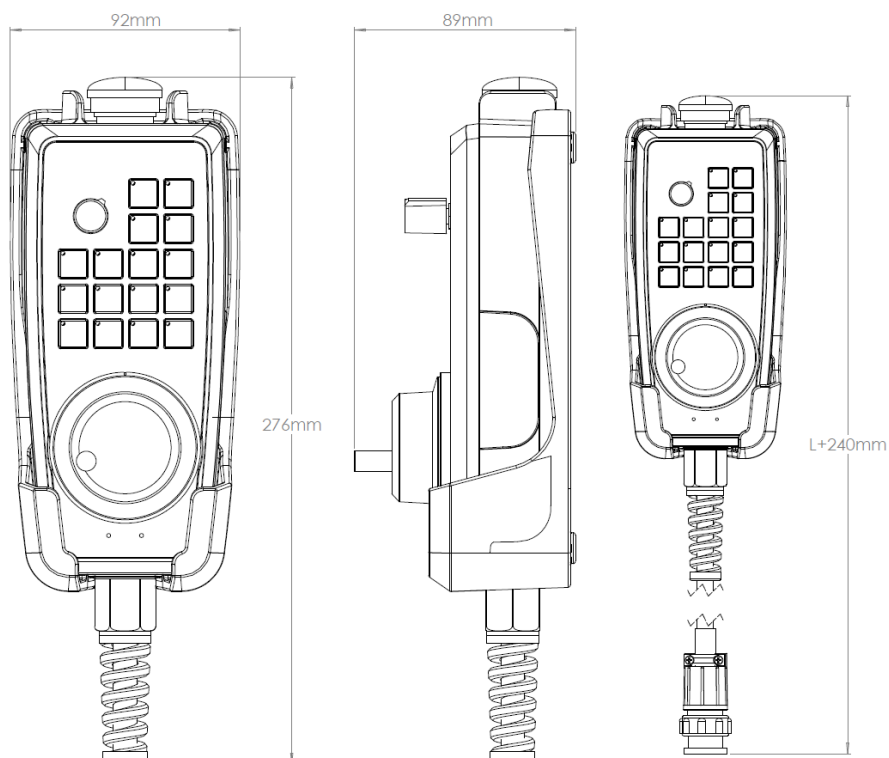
Remote Pendant Lite with Cradle Dimensions (mm)
